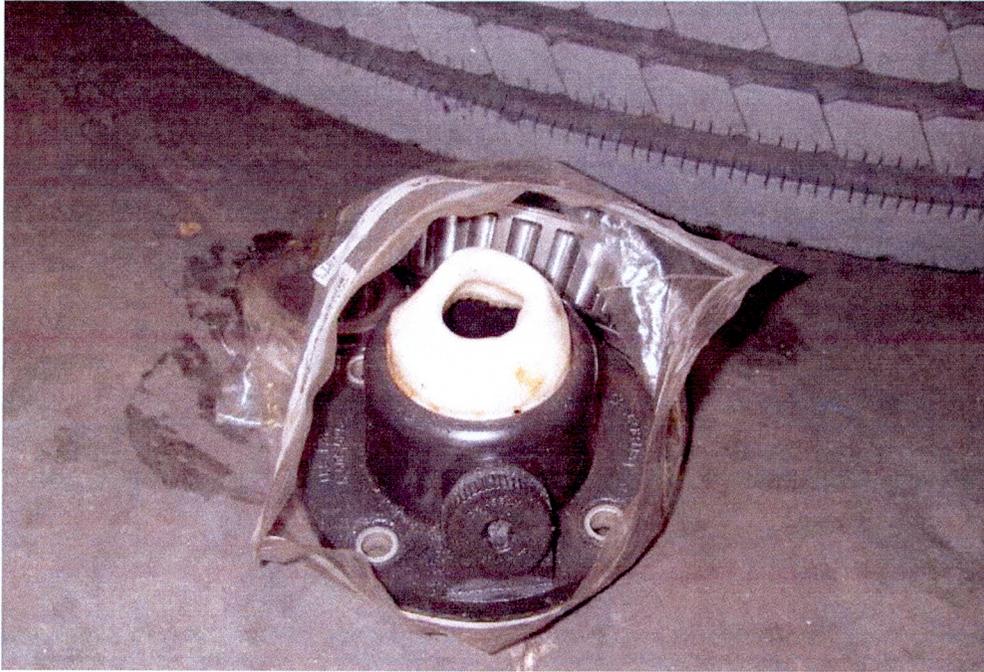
Left Hub Cover After the Owner Experienced a Hot Brake and Failed Inner Wheel Bearing Seal Just Prior to This Inspection and Testing
